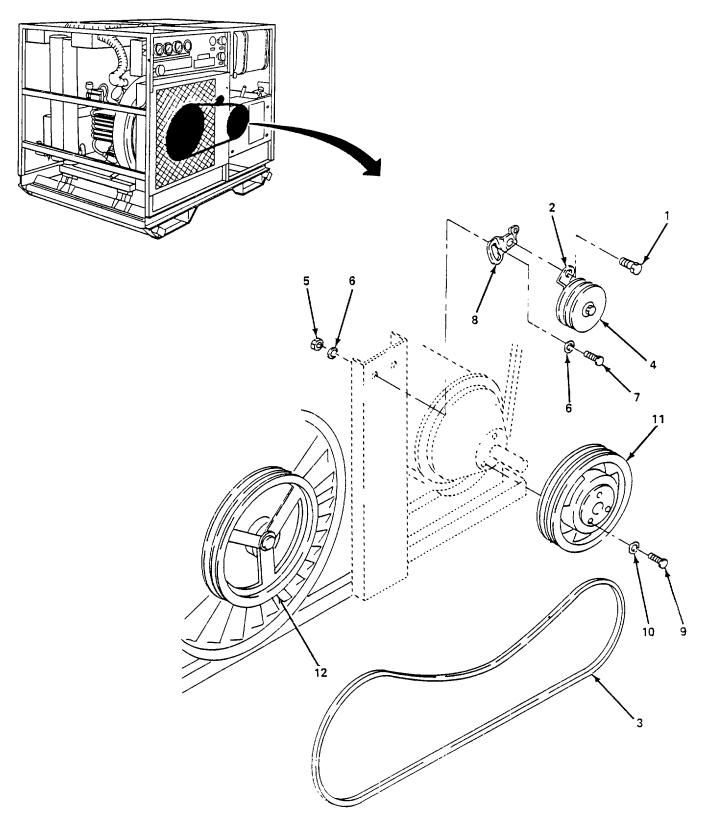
Compressor Drive Belt and Pulley, Replace.
